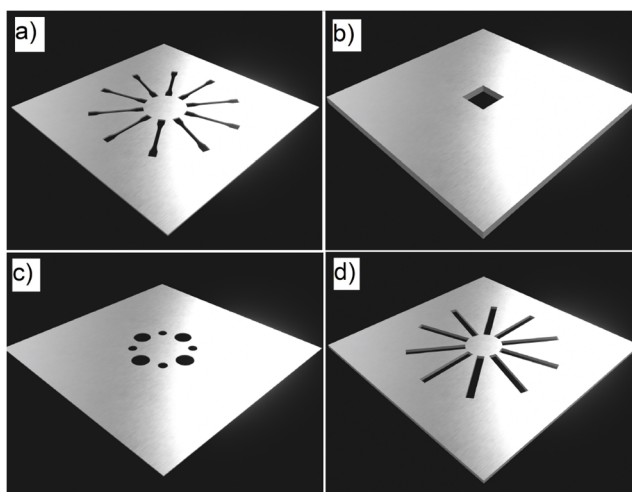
Representative images of steel molds used for the preparation of different specimens. (a) 1BA sample mold, used for producing ten quasi-static tensile test specimens, (b) single hole plate, used for producing quasi-static compressive test specimens, (c) mold used to produce specimens for both rheometry and light flash analysis, (d) mold used to produce ten specimens for  $K_{IC}$  determination under impact conditions.
